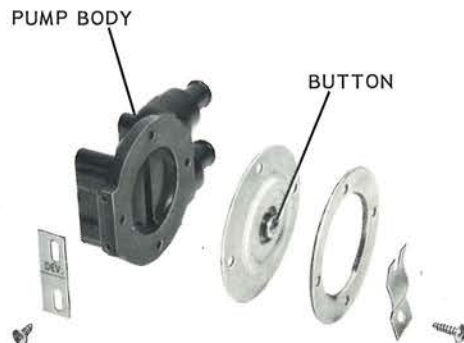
PUMP BODY ASSEMBLY (EXPLODED VIEW)
